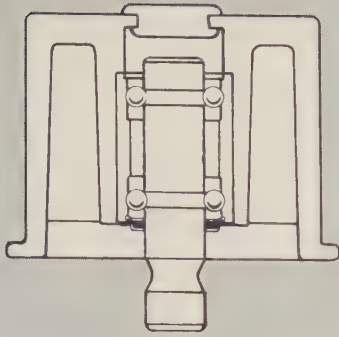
A simple method for mounting an idler pulley is illustrated by this application of a double row bearing using a special purpose, prelubricated single seal. Lubricant is contained within this bearing, but provision also is made for adding a small quantity of oil at suitable intervals to rehabilitate the original grease. This feature usually is necessary to meet the extremely long life requirements common to such fields as the textile industry from which this example is taken. The simplicity of design and small number of component parts result in considerable saving to the builder of this type of equipment.
